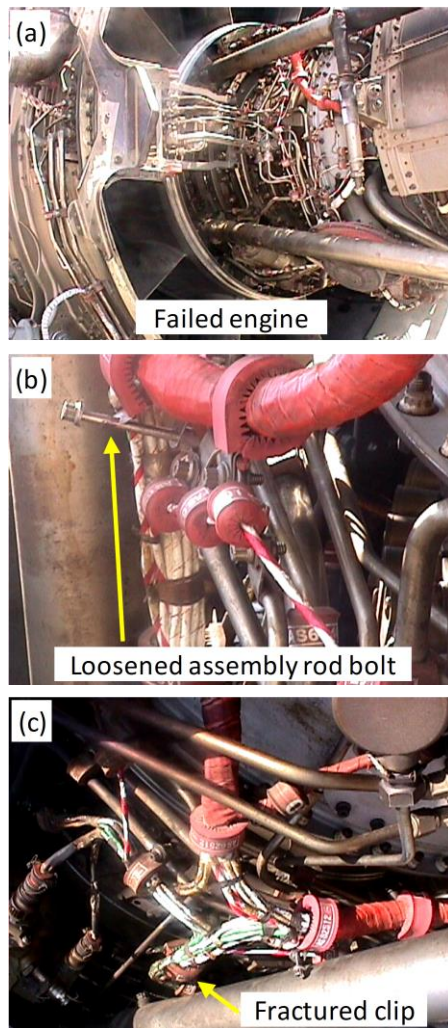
Damage of the right engine: (a) general view of the engine, (b) close-up of the assembly rod bolt, and (c) close-up of the damaged cable assembly.
